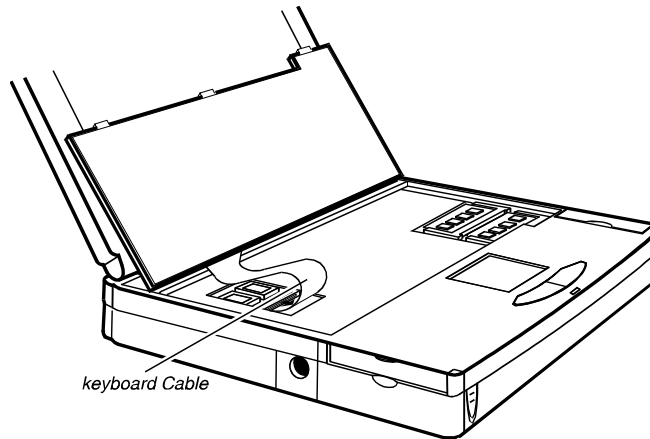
UNPLUGGING THE KEYBOARD CABLE
